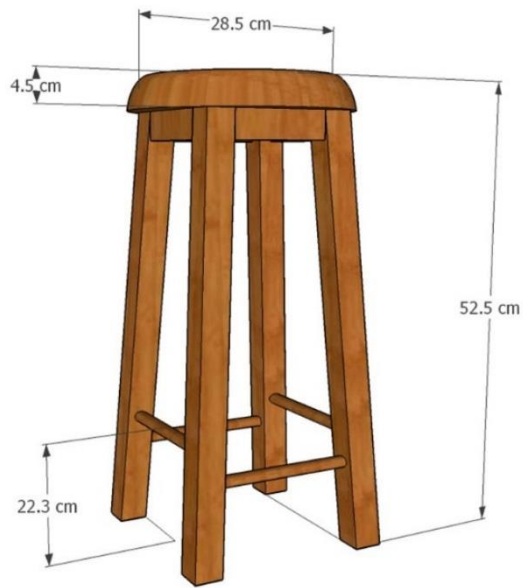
Istanbul Technical University, architecture and industrial design studio drafting chair's drawing with dimensions.
